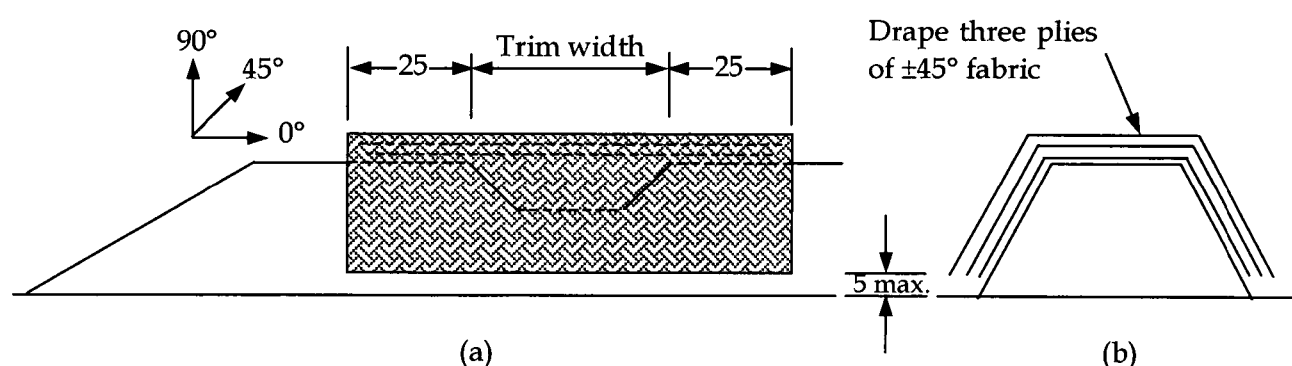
Diagram of (a) cross-section, and (b) end view, of a trimmed hat stiffener showing the dimensions and orientation of the fabric reinforcement. All dimensions in mm.
